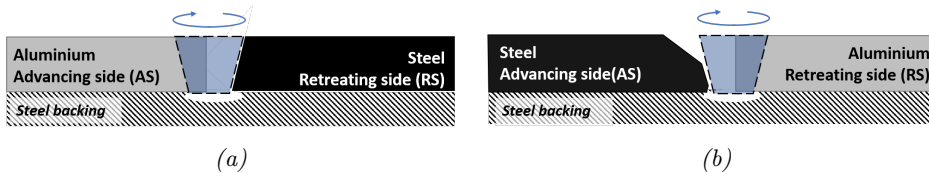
Schematic illustration of the pin and its location in the different weld grooves for (a) the first and (b) the second produced Al-Fe HYB butt weld.
